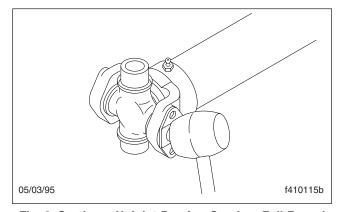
, Seating a U-Joint Bearing Cup In a Full-Round Yoke
